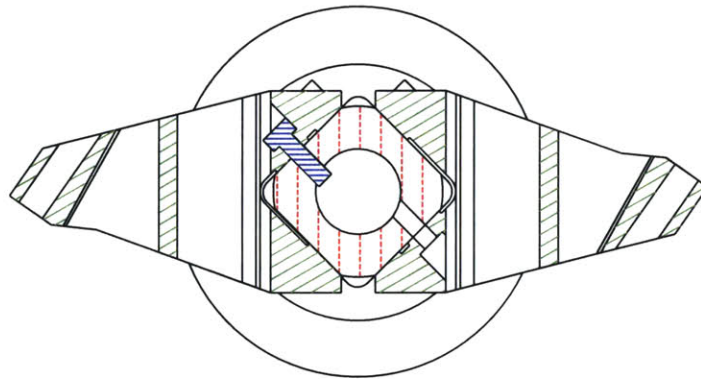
Top view cross-section of the proposed rotary fast tool servo shaft and toolarm.
